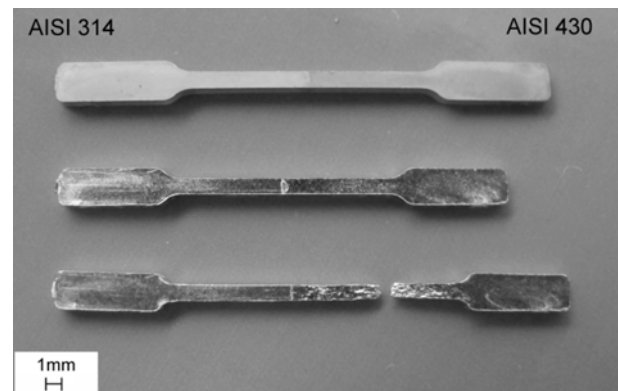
Micro tensile specimens after injection molding, after co-sintering and after tensile testing
